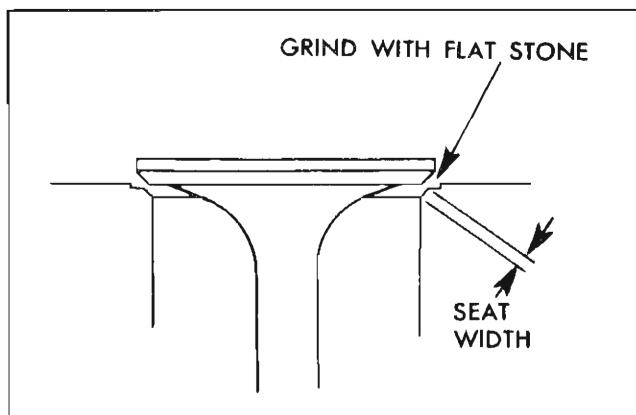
Valve Seat after Grinding with Flat Stone
